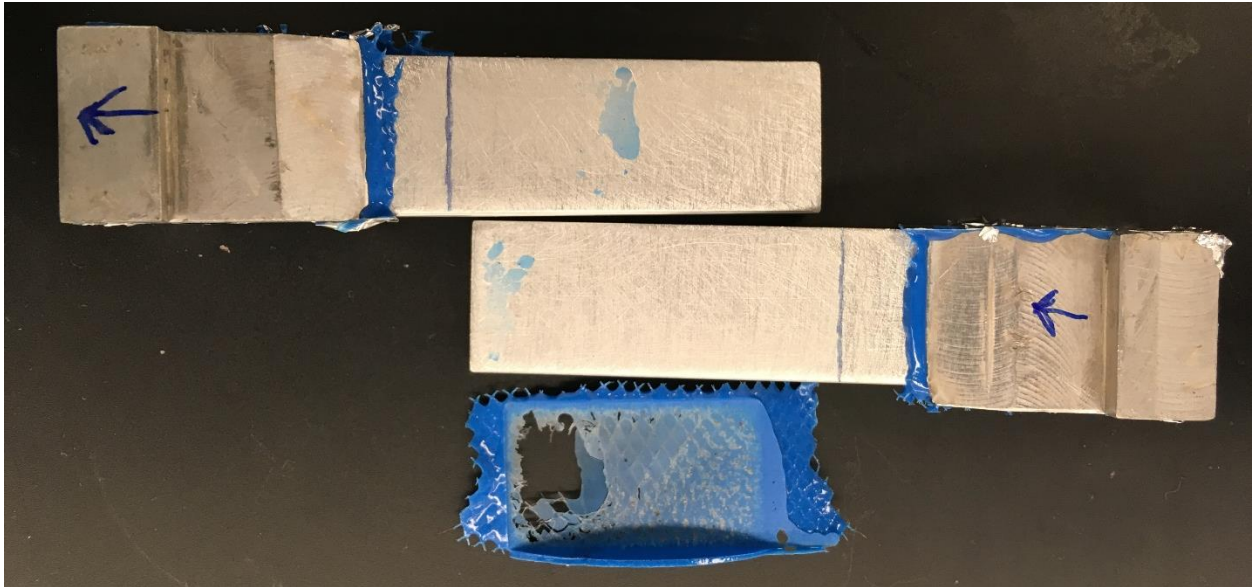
SLJ-Sample 6-Fracture Surface
